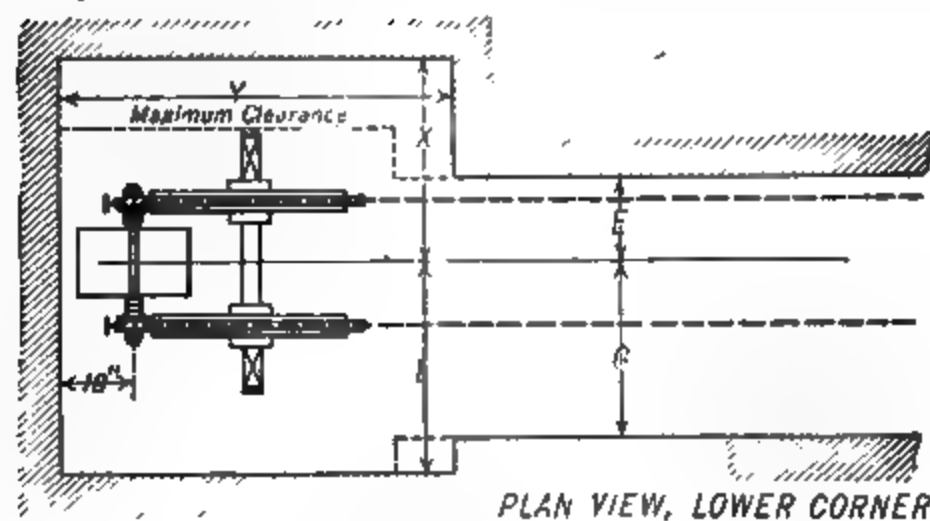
GENERAL DIMENSIONS OF 24-INCH PITCH CARRIERS (PLAN AT RISE).
